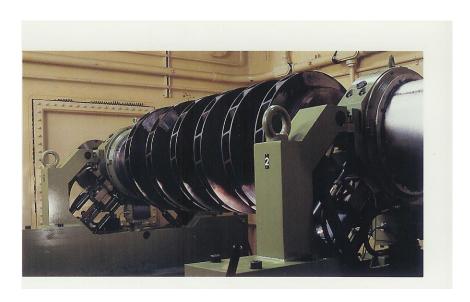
Compressor rotor in at-speed balancing machine. The rotor is balanced at operating speed in a vacuum chamber.
